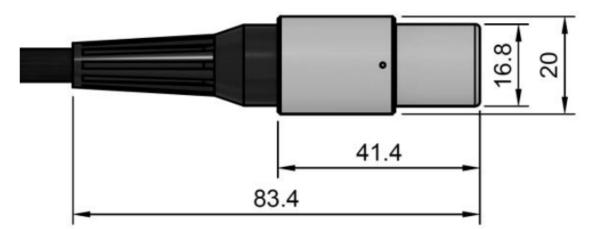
Dimensions WL-21009 Locator-A1 (dimentions are given in mm)
